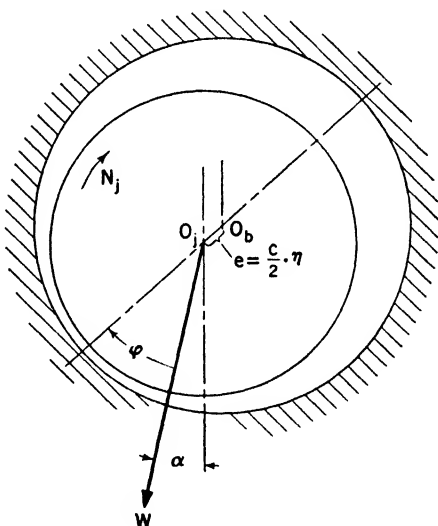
Definition sketch of a journal bearing with dynamic load.
